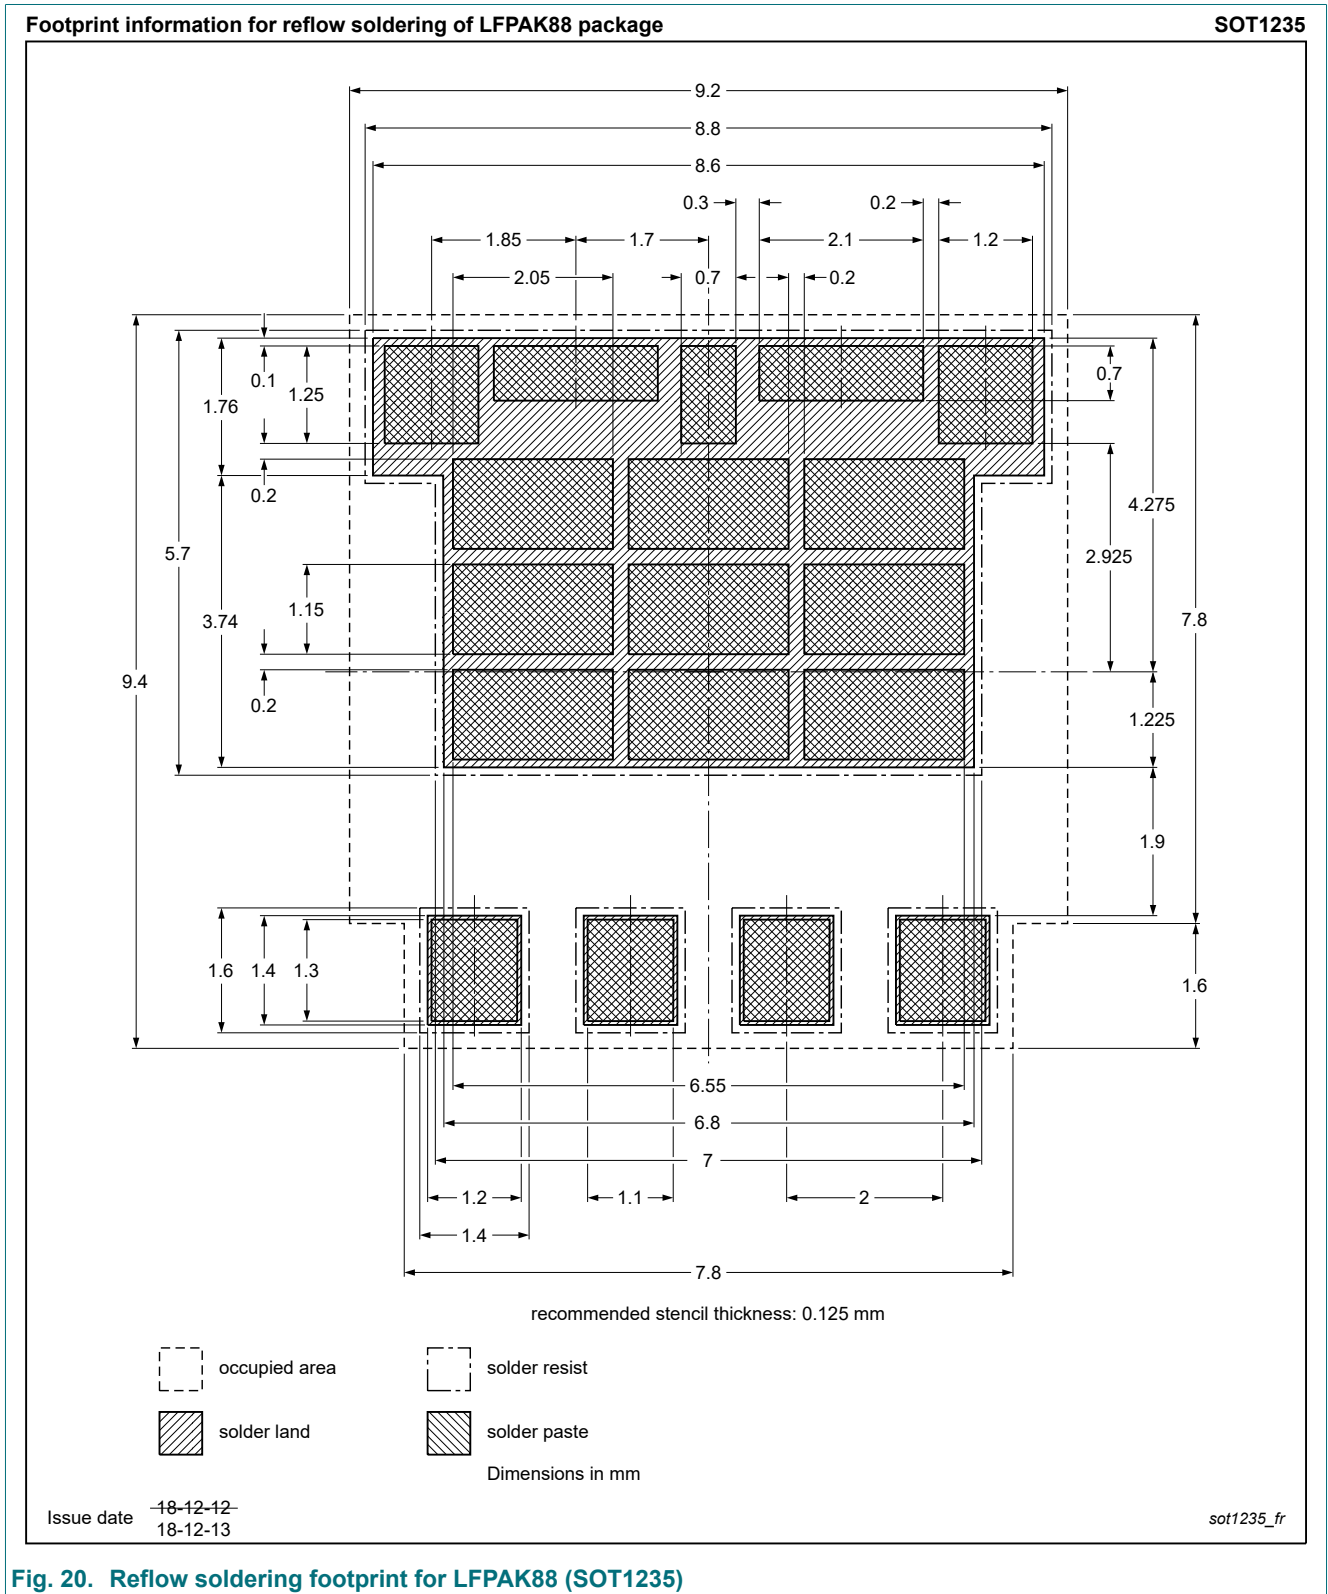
Reflow soldering footprint for LPAK88 (SOT1235)
